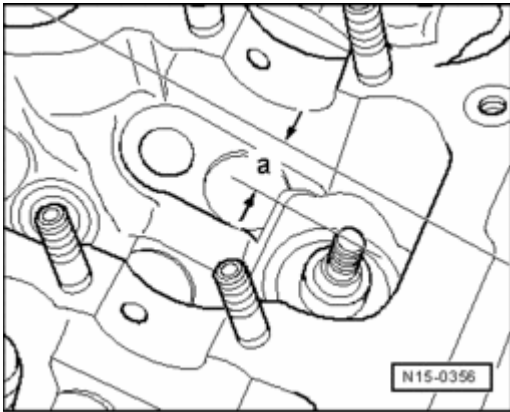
Measuring Distance Between End Of Valve Stem And Upper Edge Of Cylinder Head
